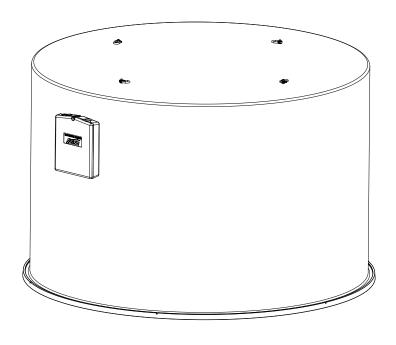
AGSE-C026-G01 Fan and Booster Container Assembly
